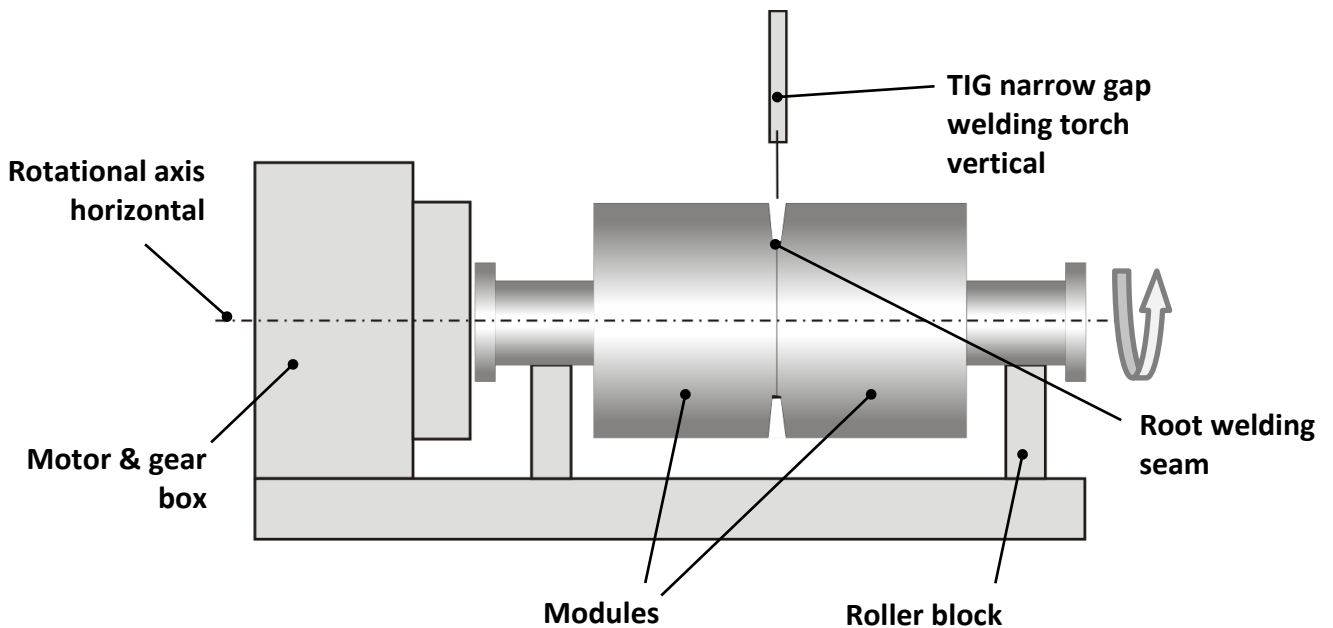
Root welding scheme - H-H/TIG-TIG
